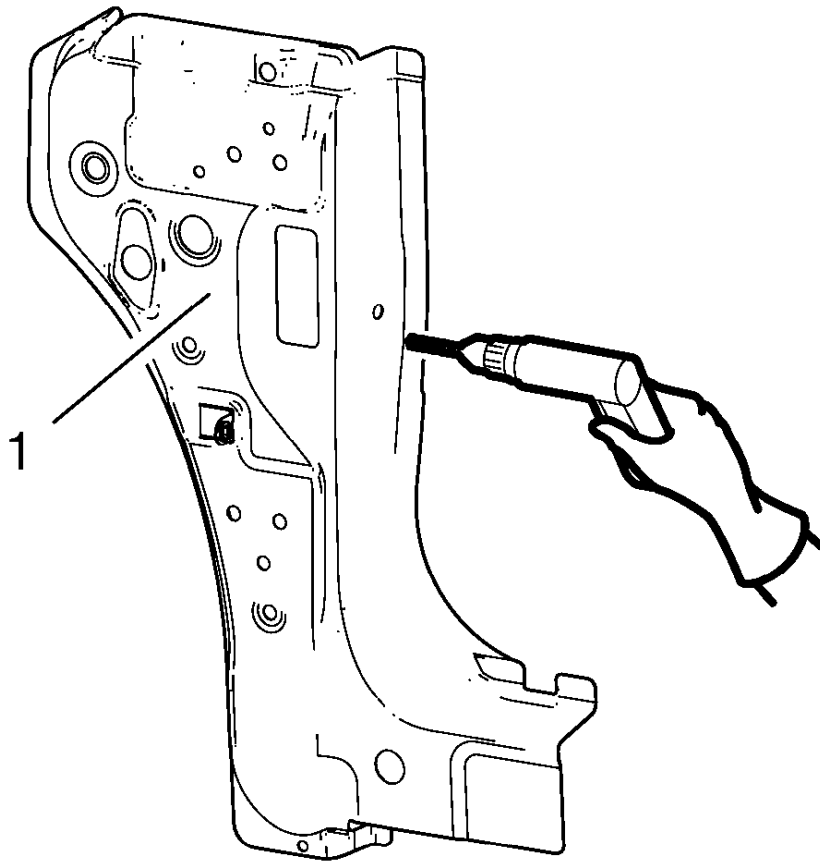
Drilling Hole For Plug Welding Body Hinge Pillar Lower Reinforcement
